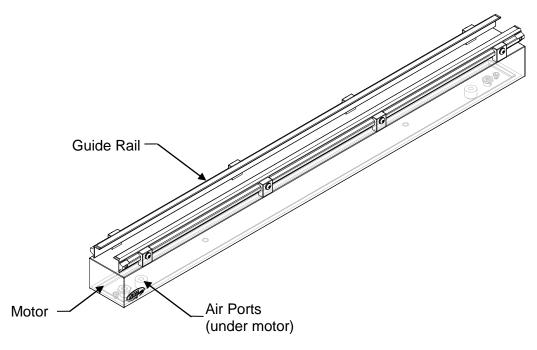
Detailed View of the 1000 mm MM LITE Air-cooled RS-422 Motor
